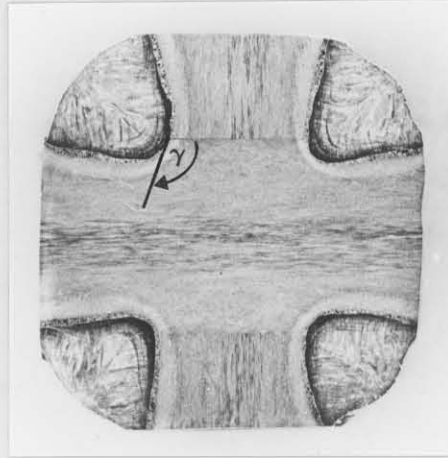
Section through the fillet welds of a MIG welded FLNFT test specimen.
